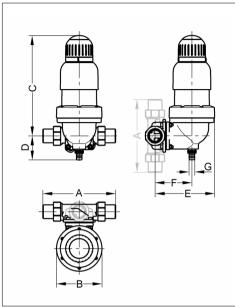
Installation dimensions JPF-QC 1½" - 2"
